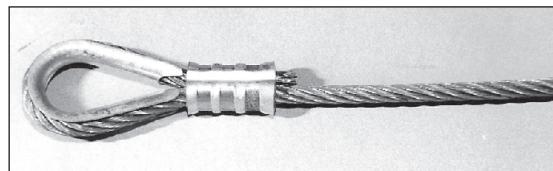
Swaged guy wire end using Nicopress fitting.
